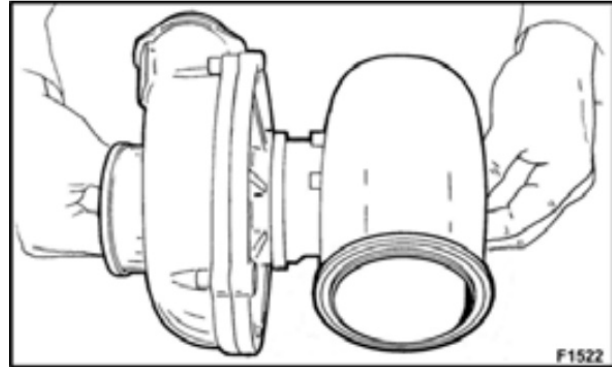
Checking for Turbine/Compressor Housing Wheel Rubbing
